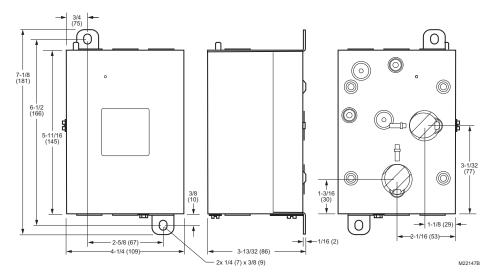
L7224A,C; L7248L mounting dimensions in inches (mm).
